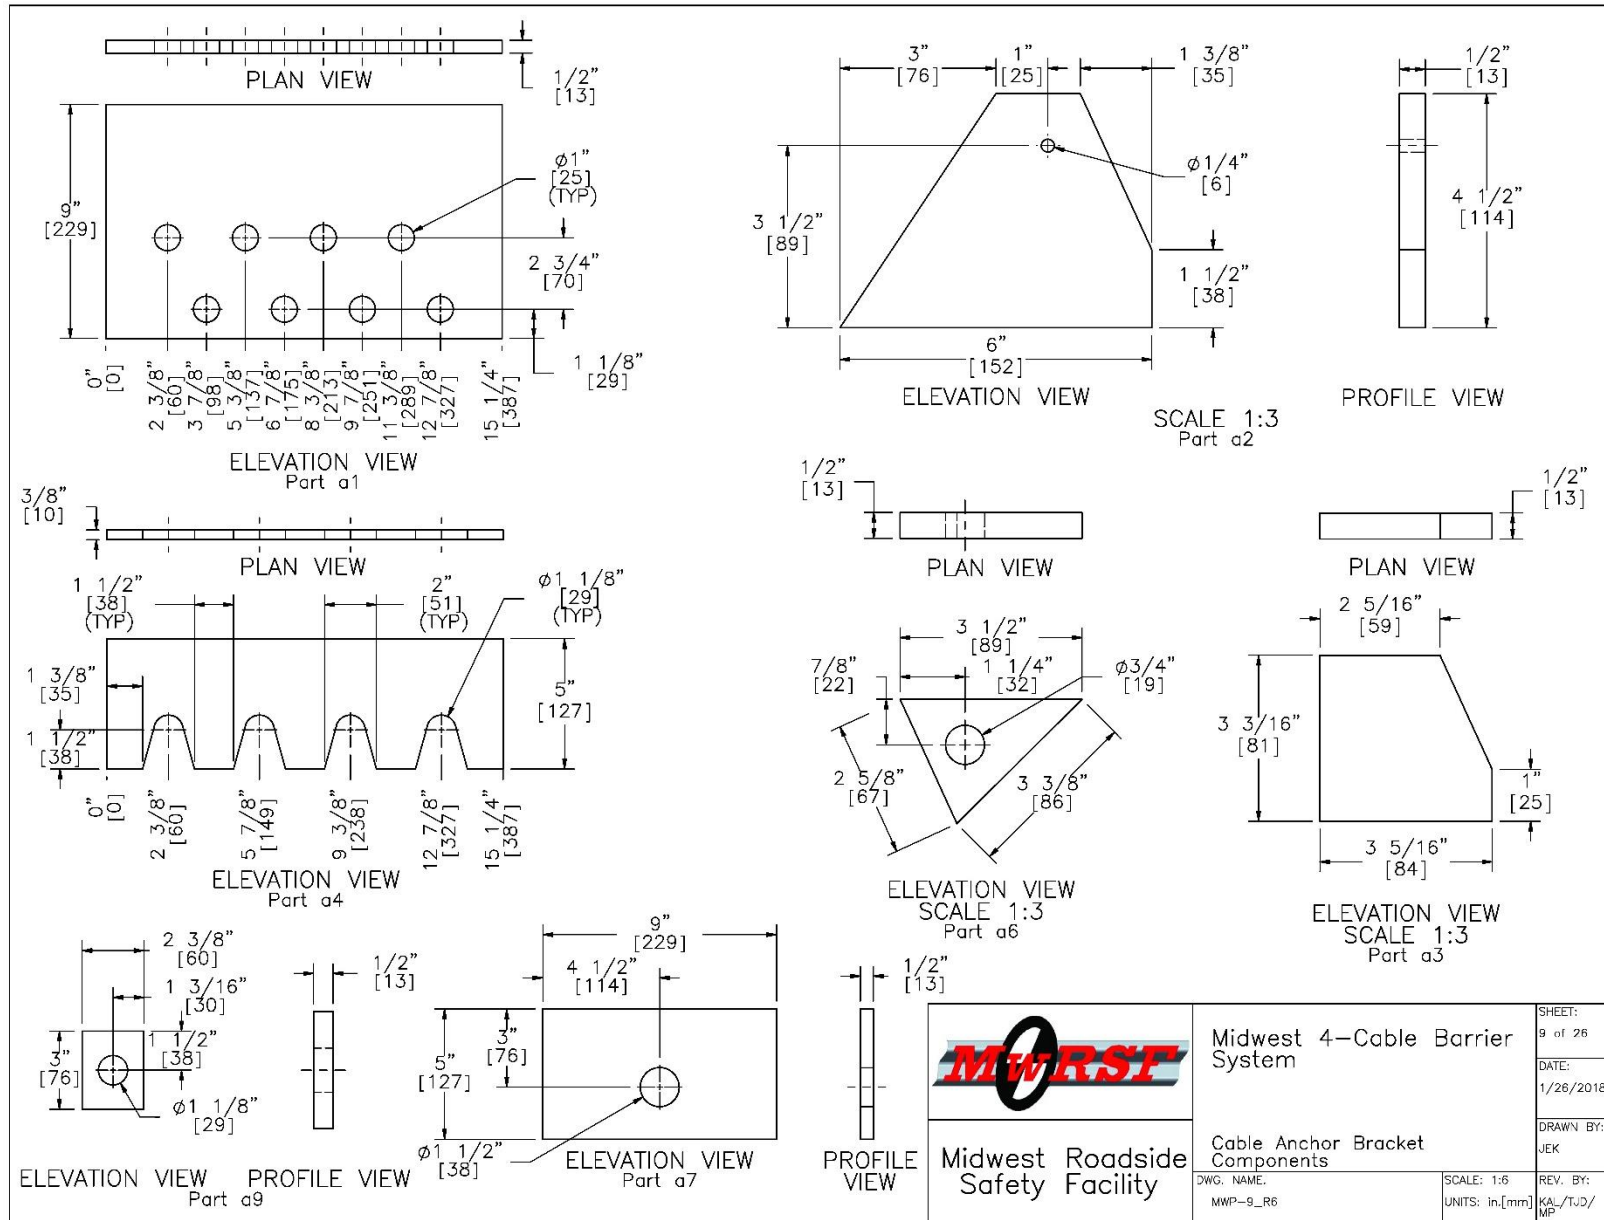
Cable Anchor Bracket Components, Test No. MWP-9
